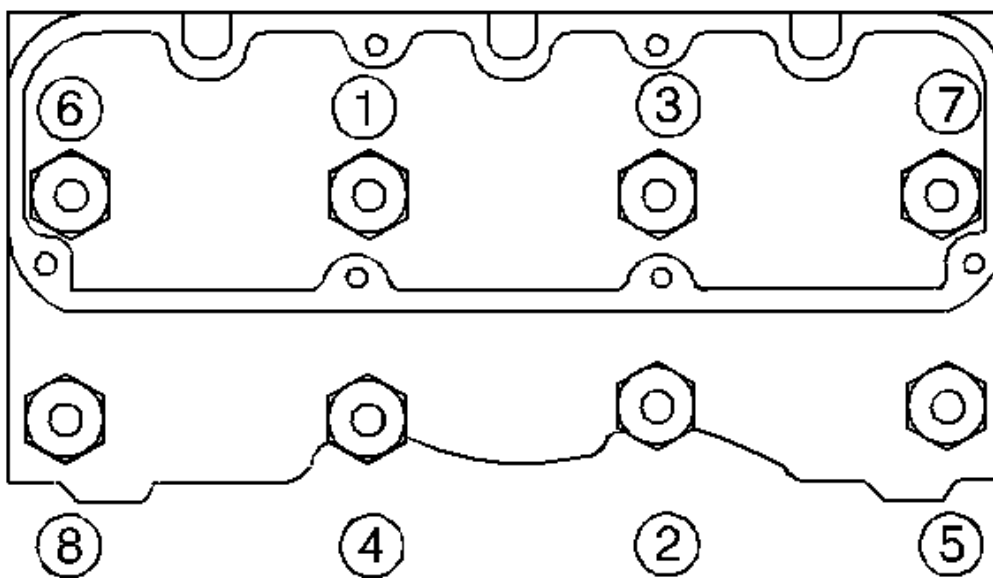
Identifying Cylinder Head Bolt Tightening Sequence
